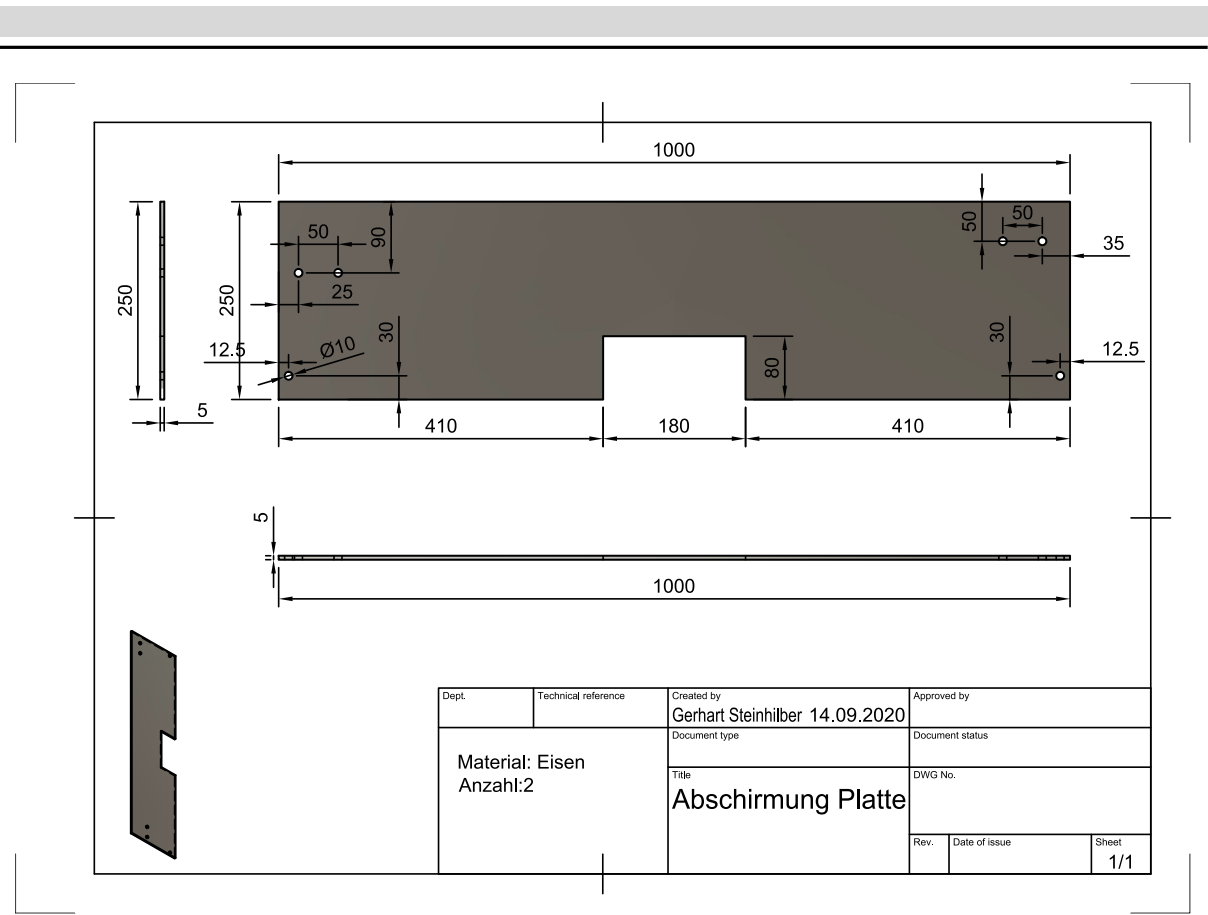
Technical drawing of the magnetic field shielding, which is attached to the front of the QCLAM spectrometer.
